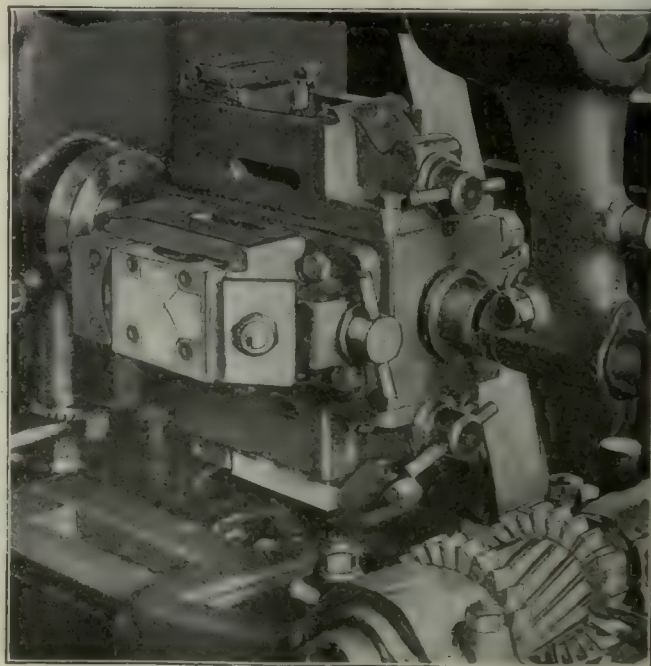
MILLING ON A GEAR-CUTTING MACHINE
